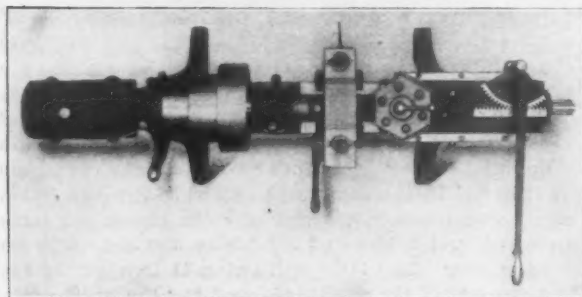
A Top View of the No. 1 Tilted Turret Screw Machine.
